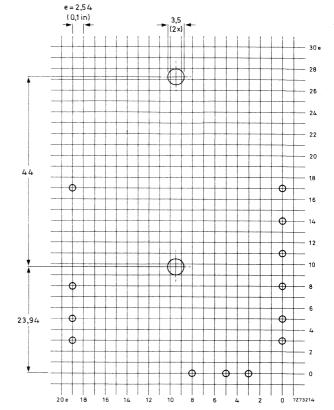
Hole pattern for mounting on a printed-wiring board (solder side). Grid hole diameter 1,3 ± 0,1 mm.
